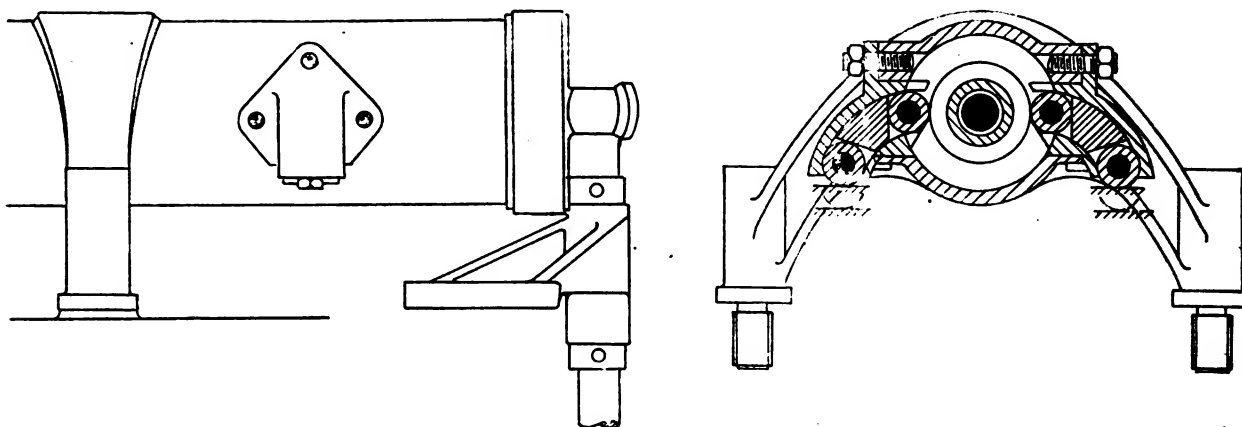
THE BUGATTI OVERHEAD VALVE GEAR WHICH IS CHARACTERIZED BY CURVED QUADRANT-SHAPED PUSH-RODS WITH ROLLERS AT BOTH ENDS
